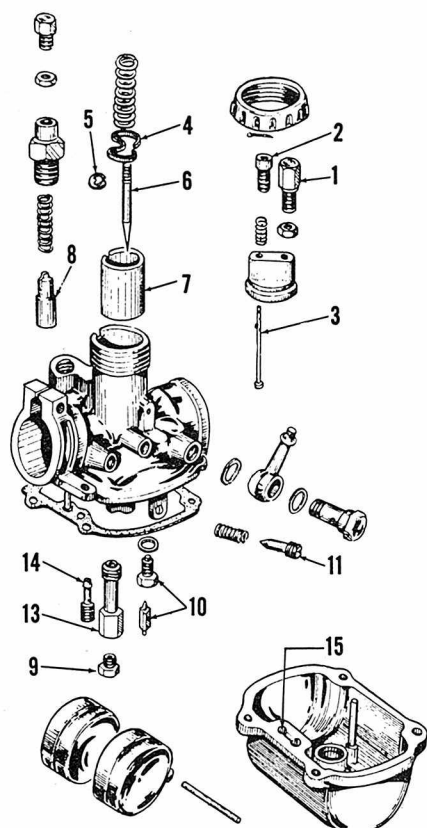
Exploded view of Mikuni VM type carburetor.
